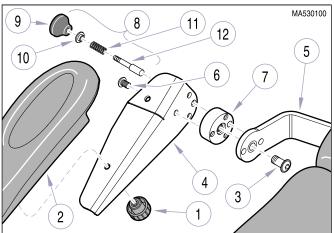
Arm Rest Locking Mechanism Removal / Installation
